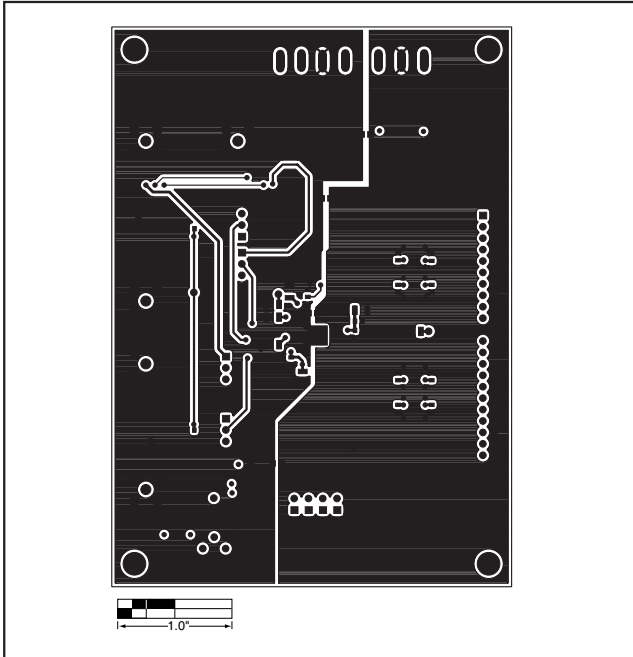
MAX1181 EV Kit PC Layout—Solder Side
